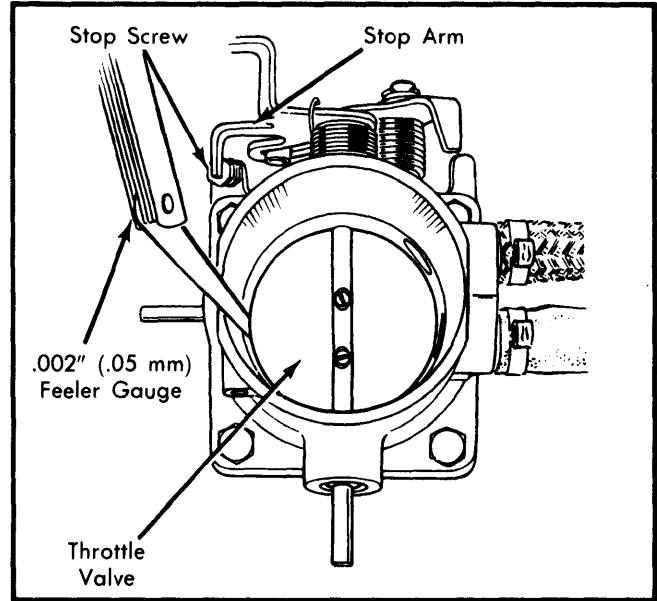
Adjusting Jaguar Throttle Valve Clearance
